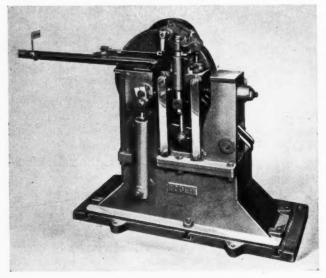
One Type of Flying Cut-off Machine, Consisting of a Cutter and Die Mounted on a Table that Moves with the Stock while the Cut is being Made
